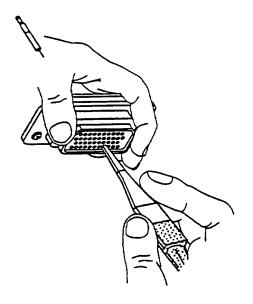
Rear Release, Broken Wire Contact Removal (Sheet 3)
